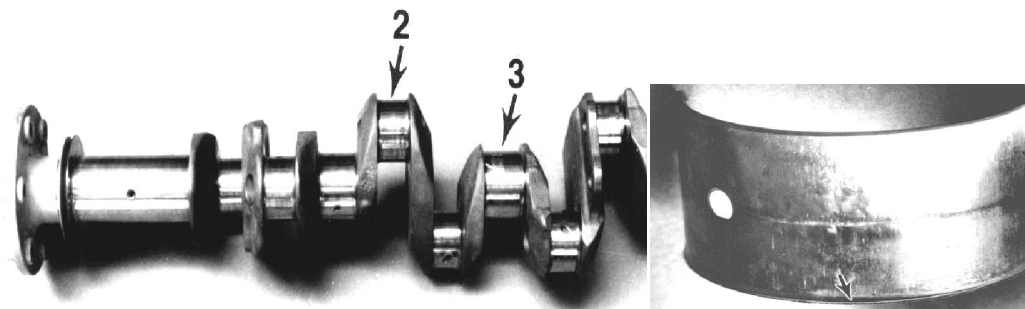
Photograph of failed crankshaft and damaged split ring bearing.
